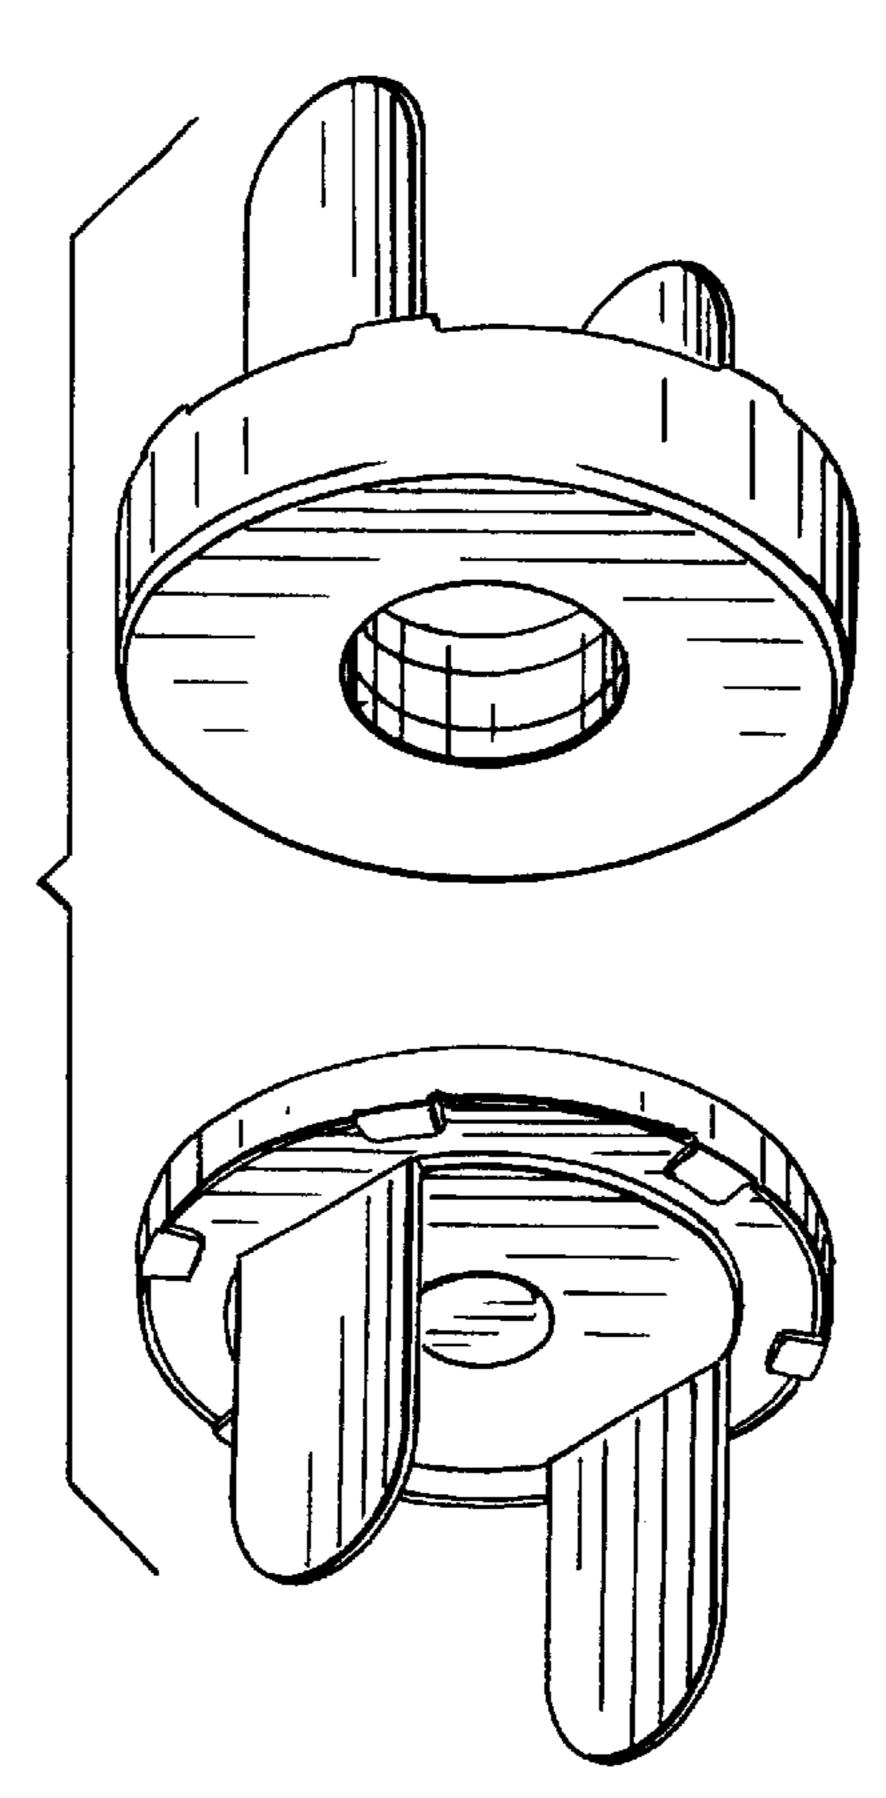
is a bottom isometric view of the male fastener and the female fastener of an exploded magnetic fastener unit in their separated or detached position with female fastener member overlying the male fastener member.
